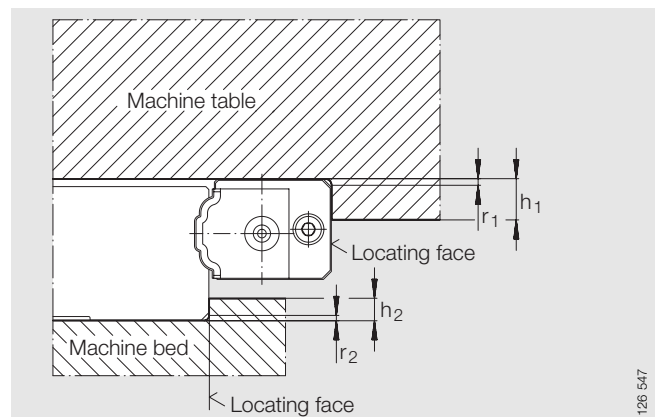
· Locating height and corner radii for linear recirculating ball bearing units KUVS
